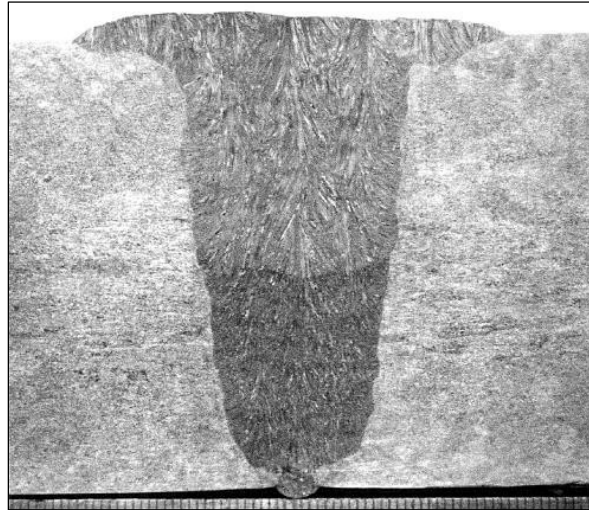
Macrograph on U-shape root GTAW + ½filling SMAW + ½ filling SAW
